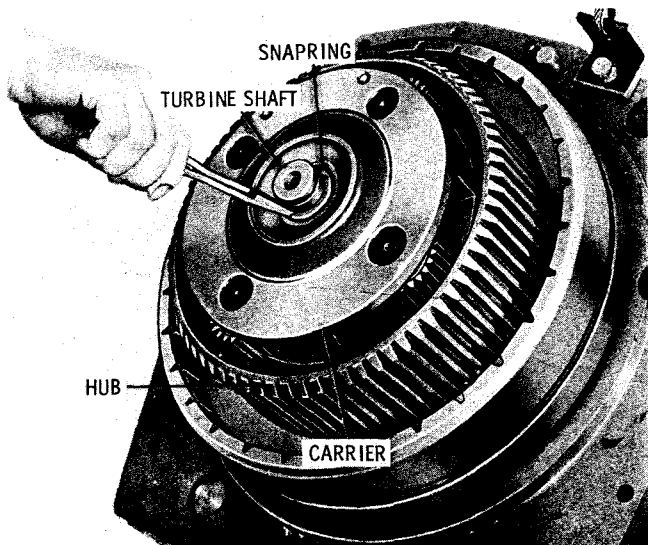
Installing snapring that retains splitter planetary (CBT, CLBT, VCLBT)
